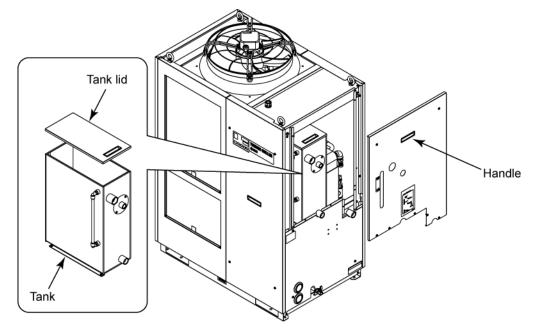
Removal of the right side panel and the lid of the fluid-fill port.
